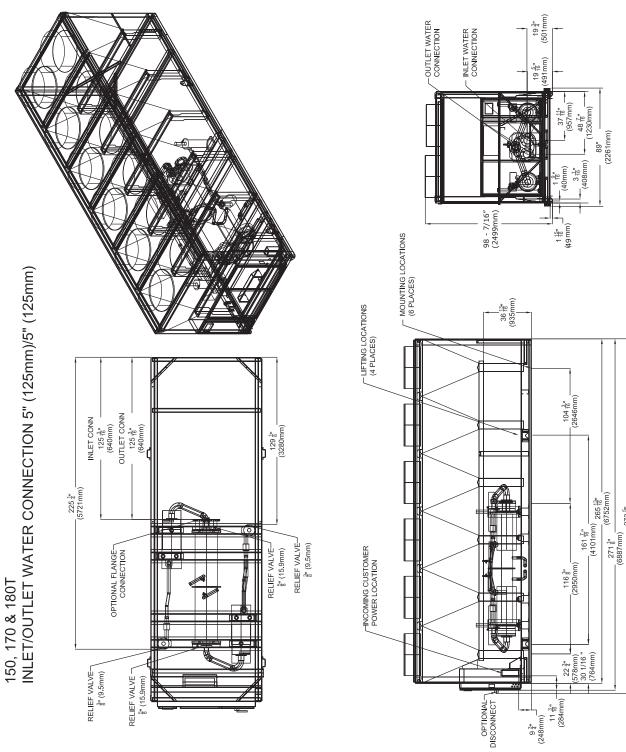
RTAF unit dimensions - 150, 170, 180 ton
